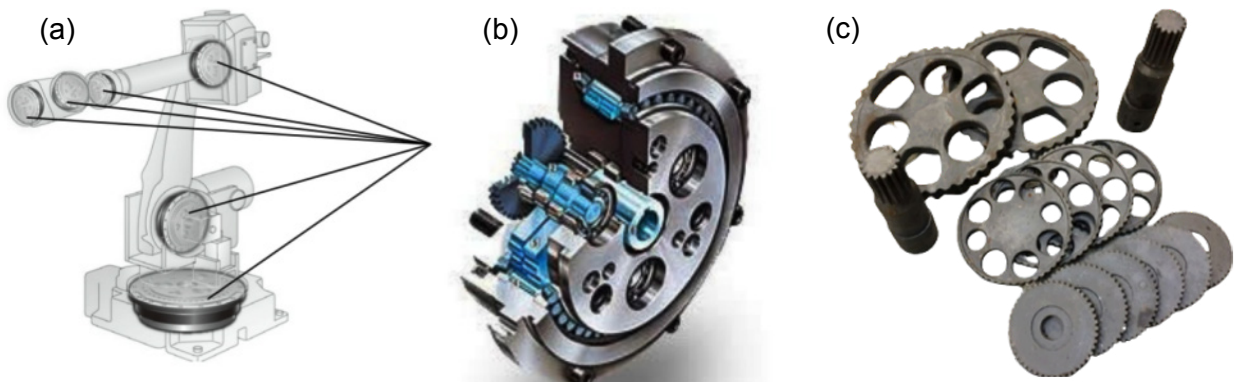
Location of gears in industrial robots (a), RV reducer (b), and ADI gears in industrial robots (c)^[20]
